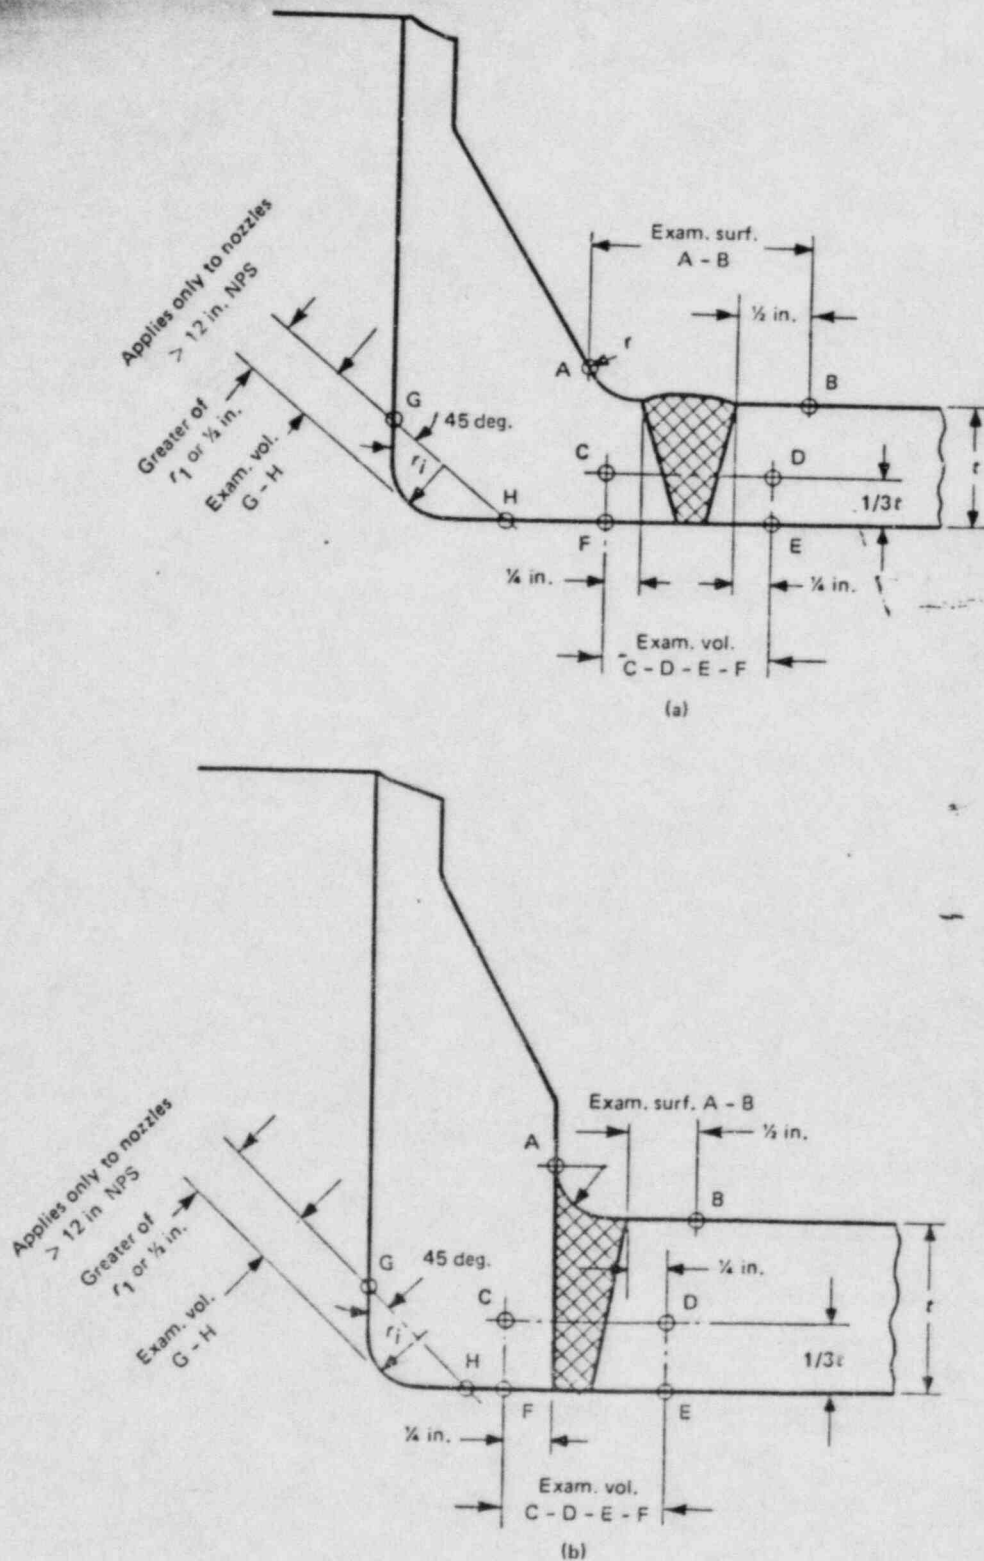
TYPICAL TUBESHEET-TO-SHELL CIRCUMFERENTIAL WELDS
